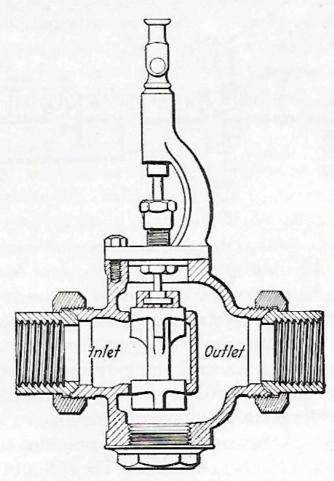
Section through a balanced valve. (Mason Regulator Co.)
